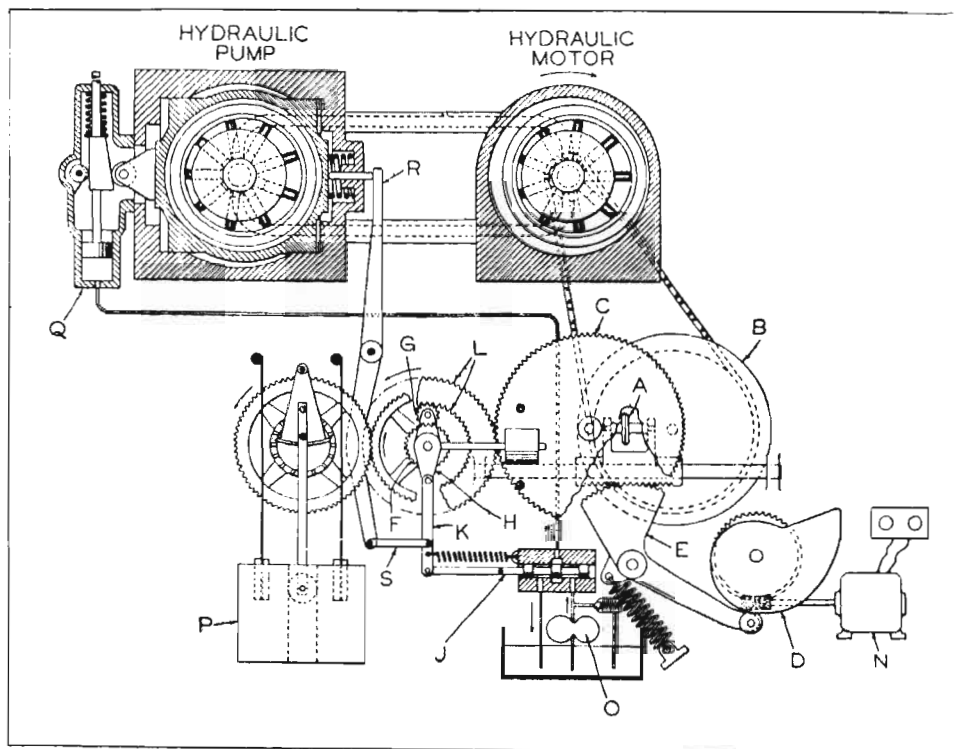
Drive Similar to That Shown in Fig. 9 but with Different Type of Timing Unit.
